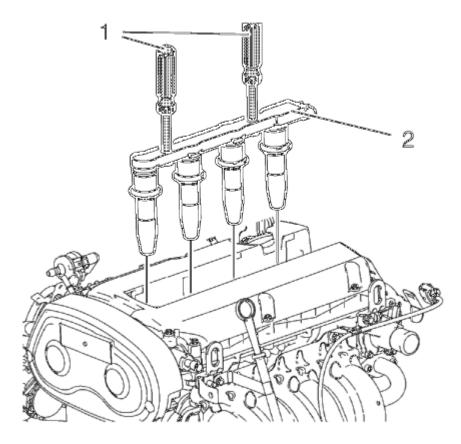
Ignition Coil Module And Special Tool Courtesy of GENERAL MOTORS COMPANY
